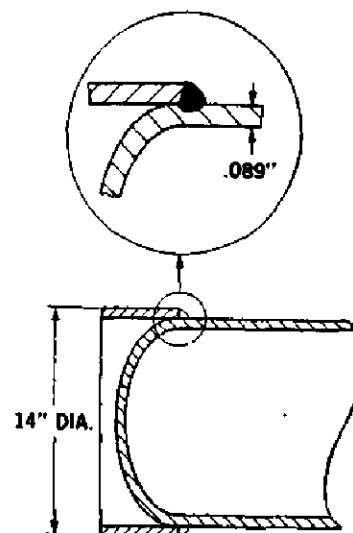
Circumferential fillet welding joining the foot ring to an LPG tank: joint design.
